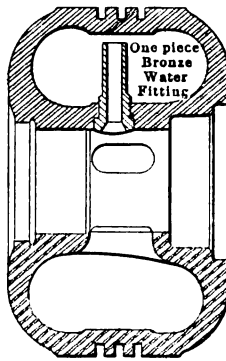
SECTION OF GAS-ENGINE PISTON; RINGS 1 IN. BY  $1\frac{1}{8}$  IN.
